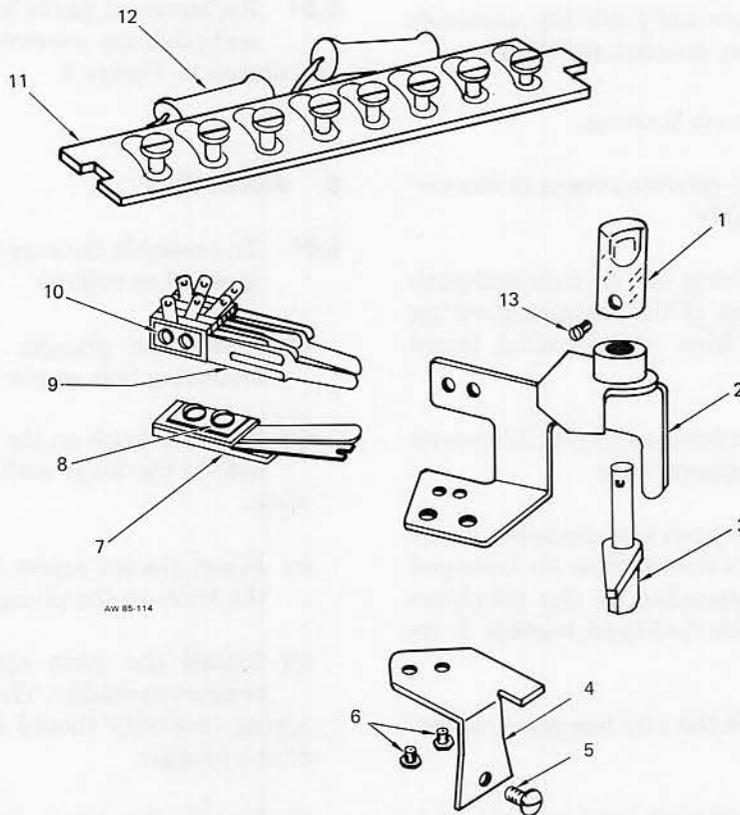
Model 79453 Turn-And-Push Key Assembly, Exploded View
